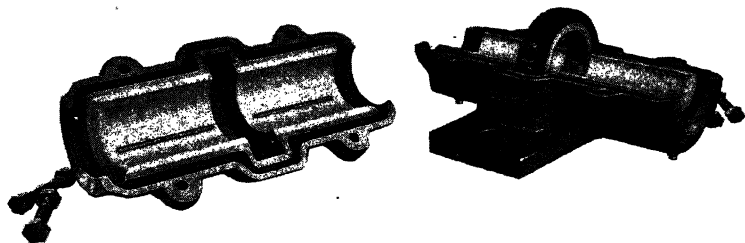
Collar-oiled lineshaft bearing. (Courtesy Link-Belt Co.)
